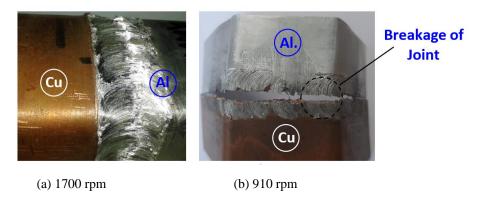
Images of the Al-Cu joint welded at rotational speeds of (a) 1700 rpm and (b) 910 rpm after the bending test. The traverse speed is equal to 16 mm/min. The copper has been annealed.
